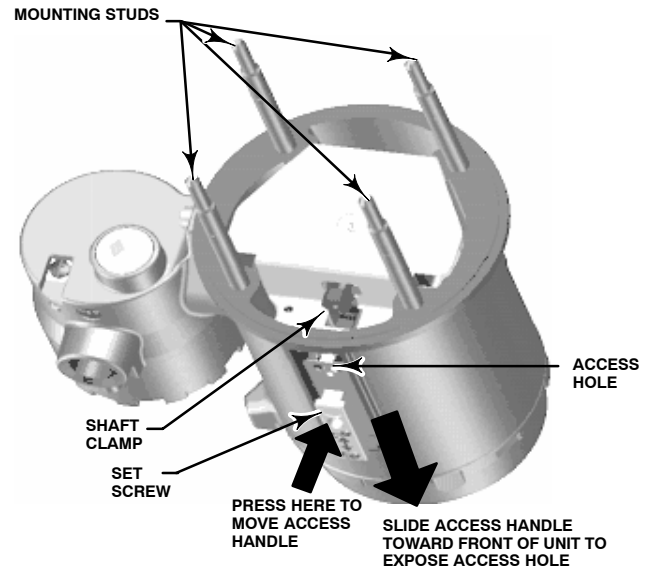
Sensor Connection Compartment (Adapter Ring Removed for Clarity)
